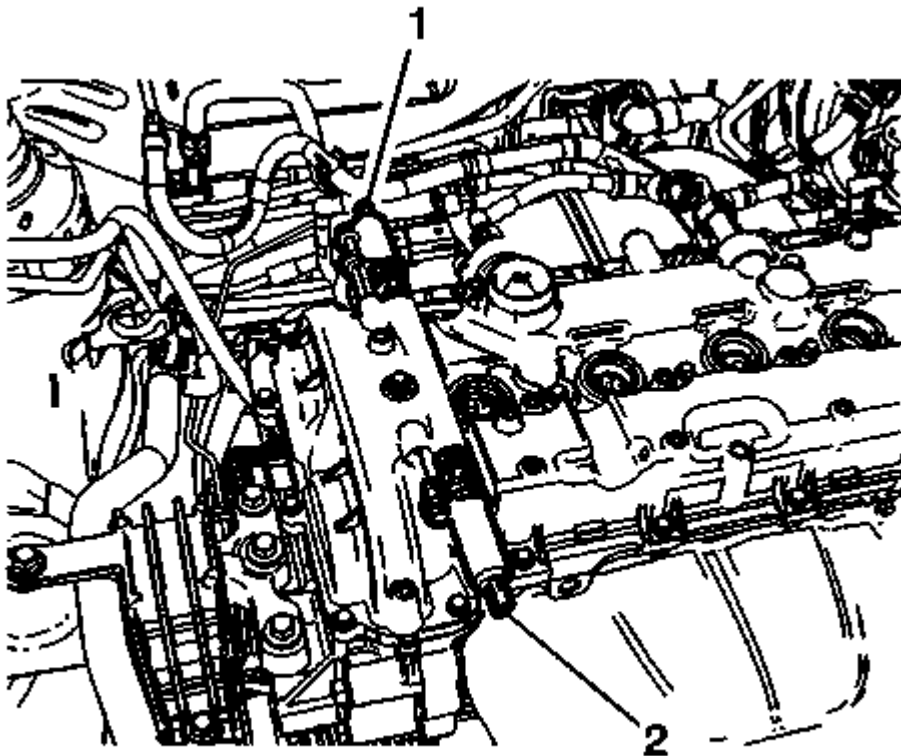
Camshaft Position Actuator Intake Solenoid Valve
